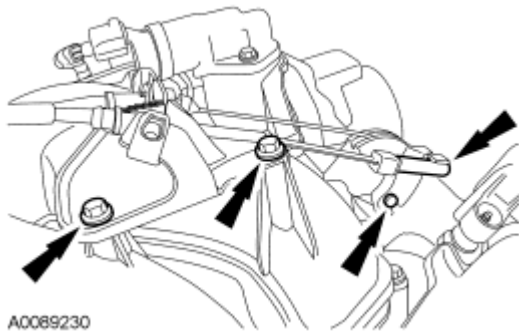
Accelerator Cable, Speed Control Actuator Cable & Cable Bracket Bolts
